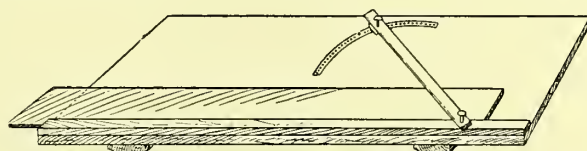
Cutting Board for Diamond-shaped Panes
